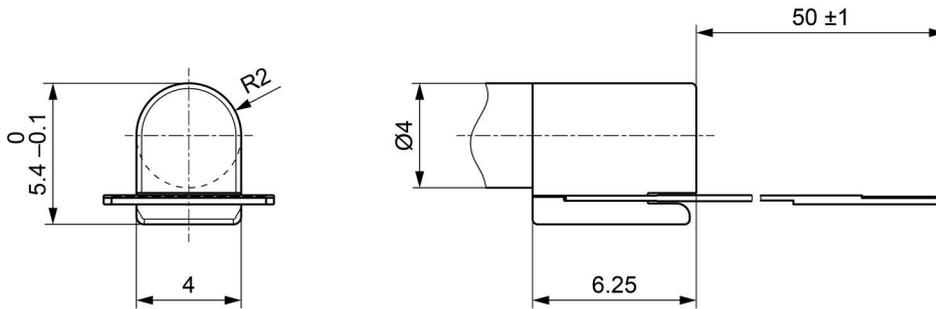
Dimensional Drawing [mm] – ENX 4 MAG
